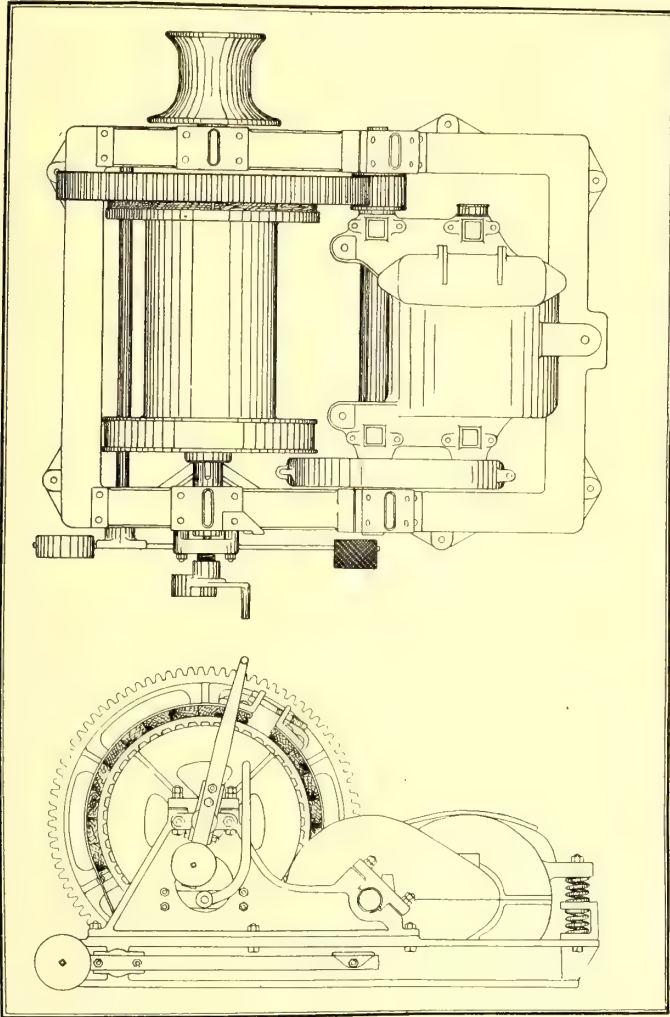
PLAN AND ELEVATION OF ELECTRIC HOIST
